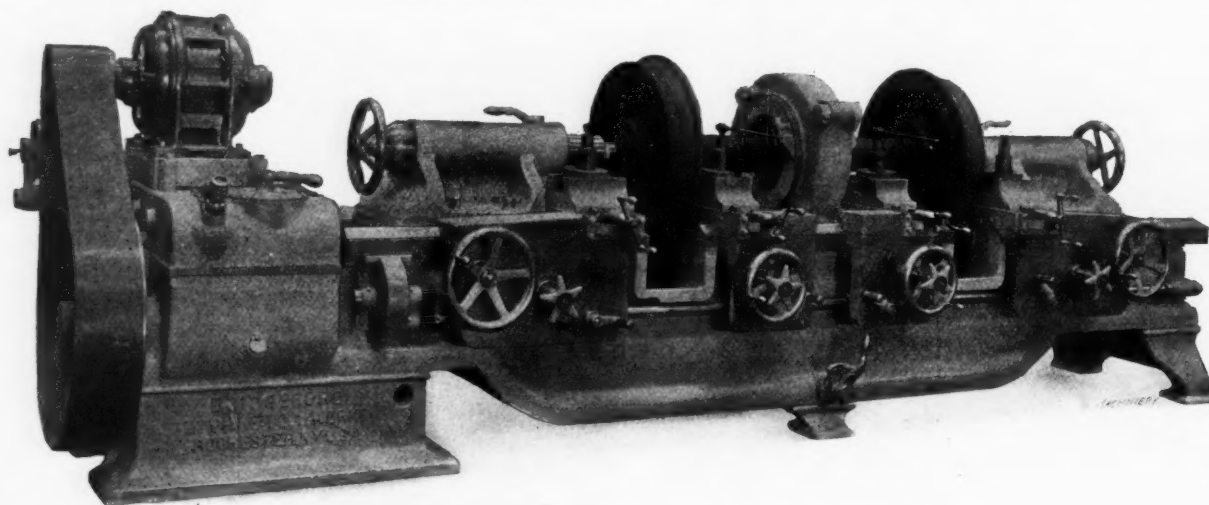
Bridgeford Lathe with Regular Carriages and Two Extra Inside Carriages
